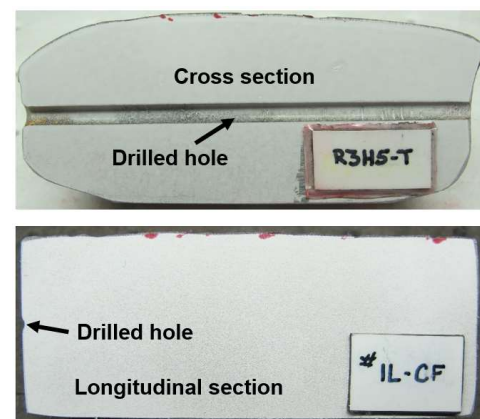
Transverse cross section and longitudinal section treated with dye penetrant
